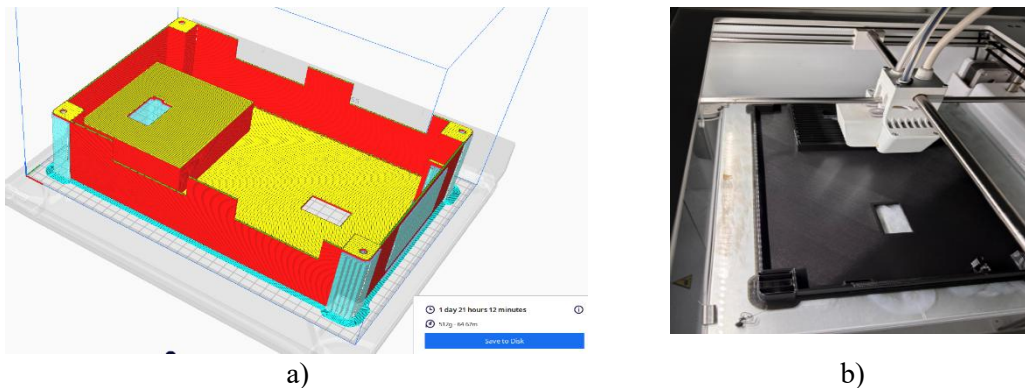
a) Part presentation in Ultimaker Cura, b) Casing during the printing process
